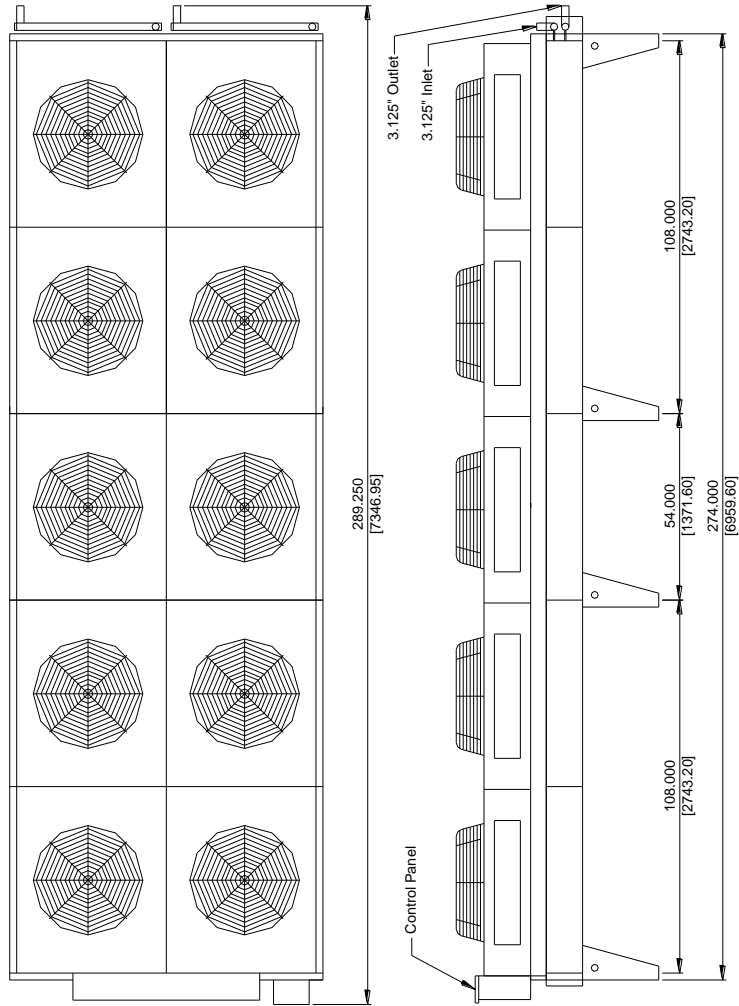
MXR125 Remote Condenser Model LAVF25410 Weight & Dimensions Drawing
